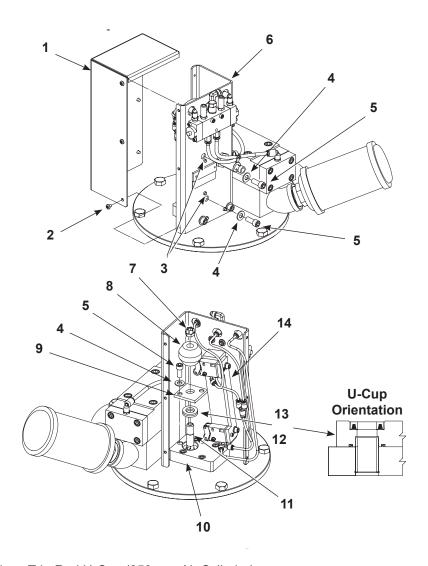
Remove/Replace Trip-Rod U-Cup (250 mm Air Cylinder)
